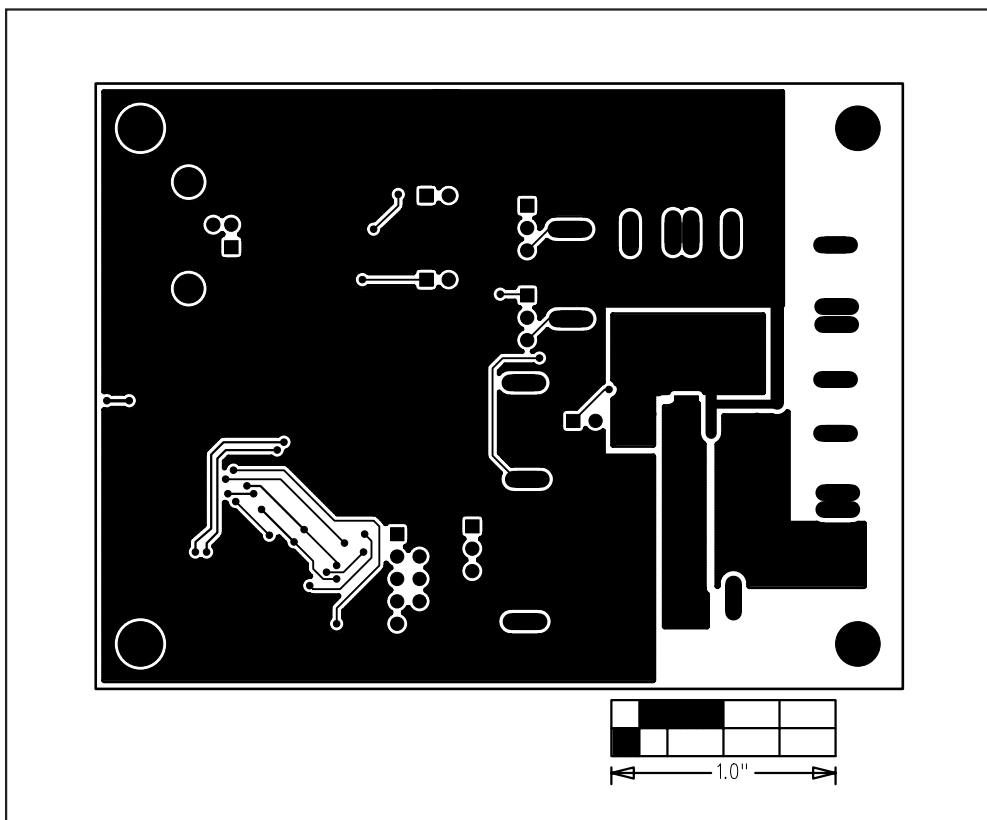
MAX17065 EV Kit PCB Layout—Solder Side
